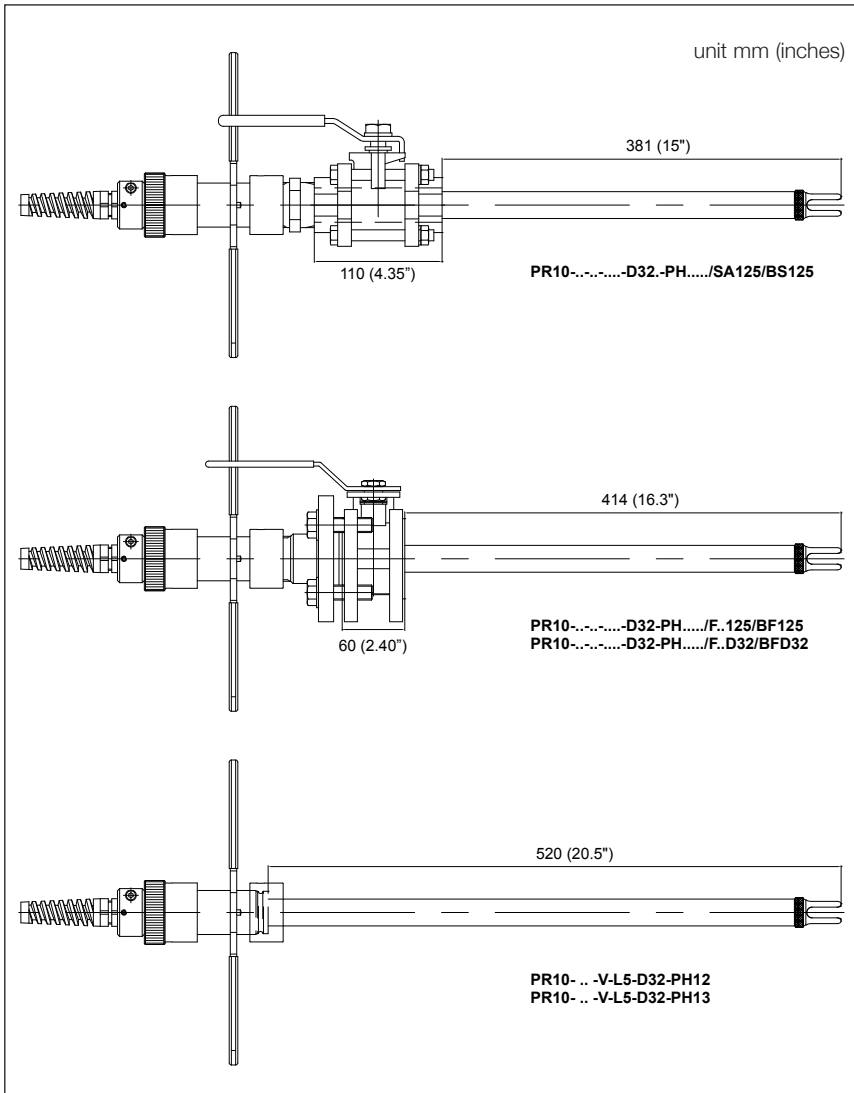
Dimensional drawing PR10...-D32 with mounted pH sensor
